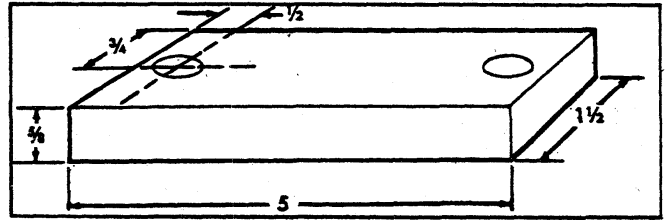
Flaring Tool Back-Up Plate (Corvette)
